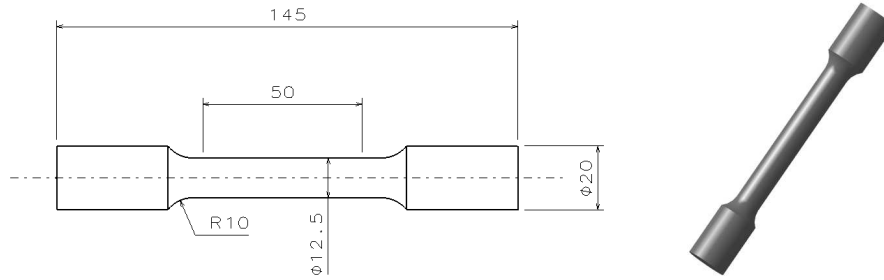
Dimensions of the tensile test specimen according to ASTM E8M (Dimensions are in mm)
